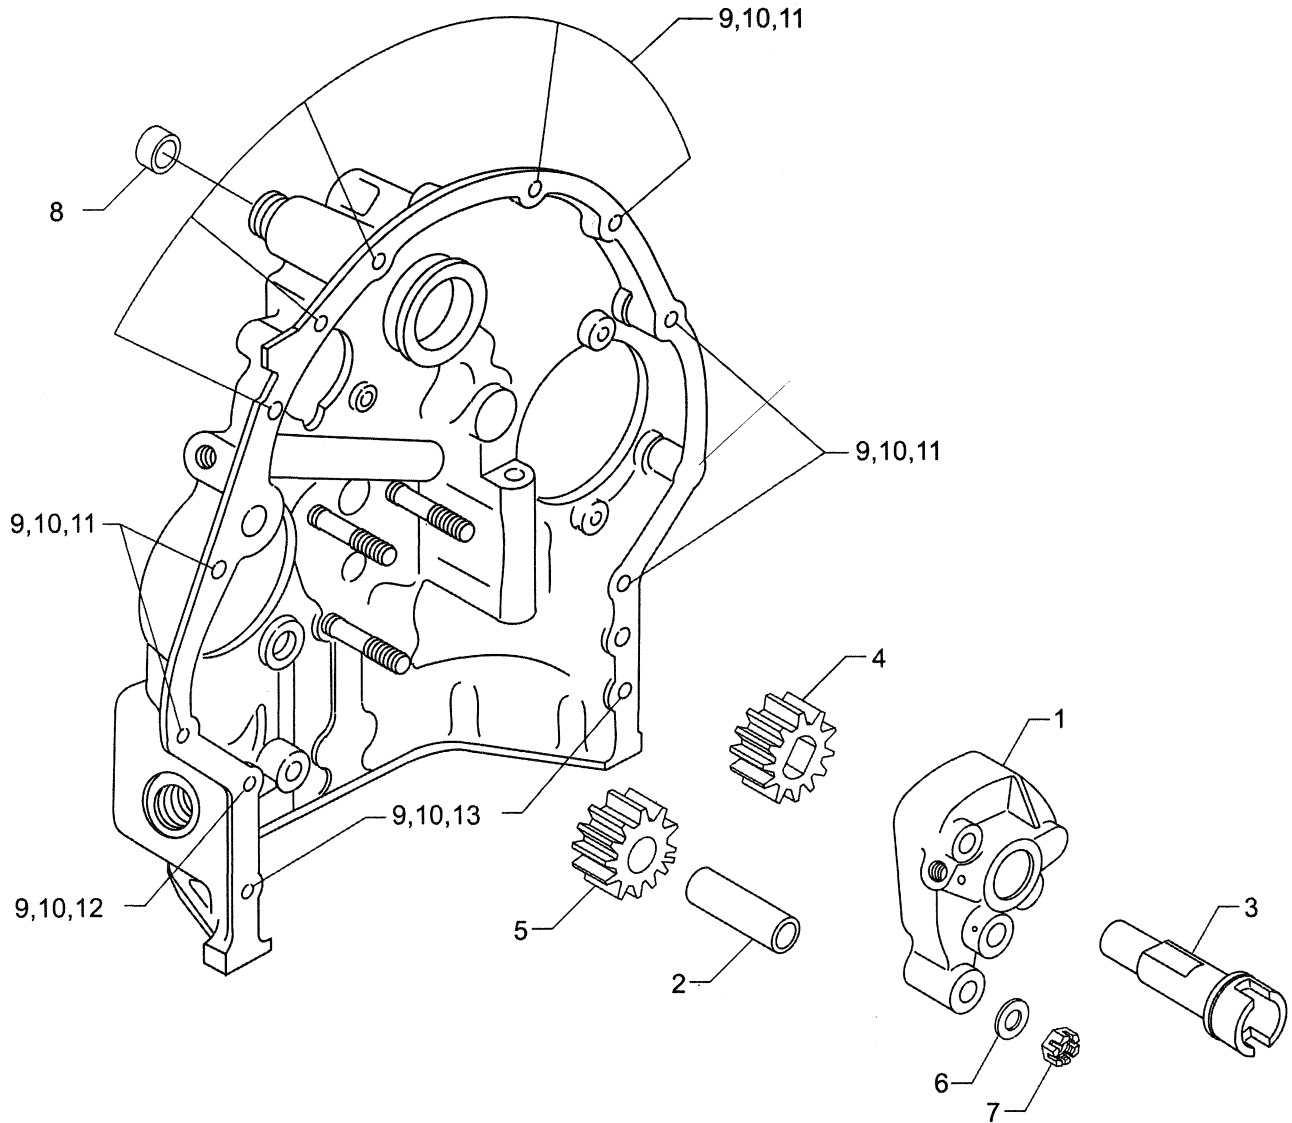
OIL PUMP ASSEMBLY AND ACCESSORY HOUSING ATTACHING PARTS
